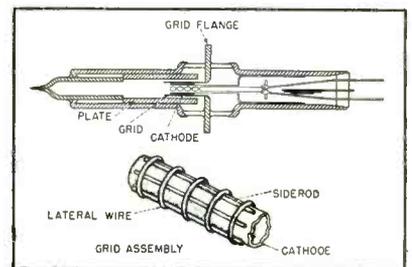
Cross-section of typical pencil-tube triode and enlarged view of conventional coaxial grid and cathode
